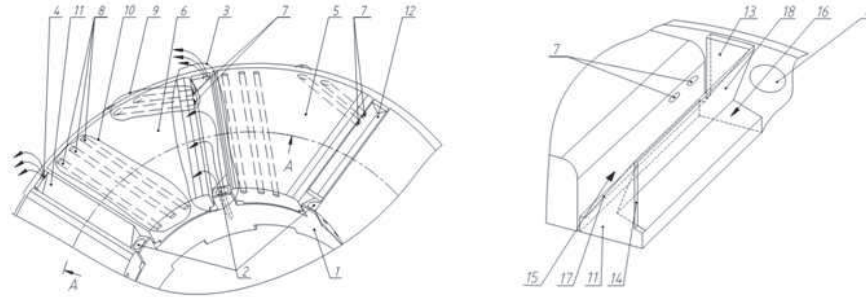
Tilting pad thrust bearing: 1 – housing; 2 – oil supply channels; 3 – interpad space; 4 – channels for draining lube oil off; 5, 6 – tilting thrust pads; 7 – oil cooling channels at inlet edge; 8 – oil cooling channels at thermally loaded zone; 9 – pad inlet zone; 10 – thermally loaded zone; 11, 12 – multifunctional oil-removal scrapers; 13 – scraper bridge at drain area; 14 – scraper bridge at the area for cooling oil supply; 15 – cavity to communicate with the cooling oil supply channels; 16 – cavity to communicate with the channels for draining lube oil off; 17 – scraper back; 18 – scraper front surface.
